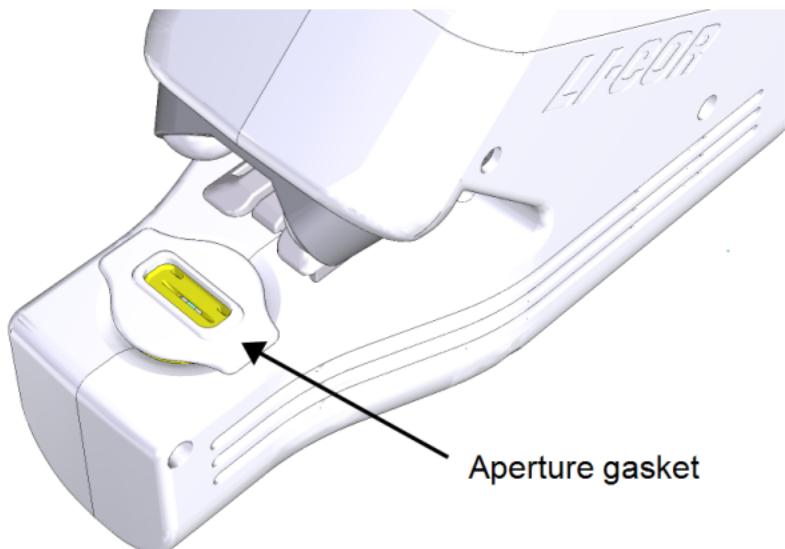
Insert one lipped edge of the clamp gasket first.
